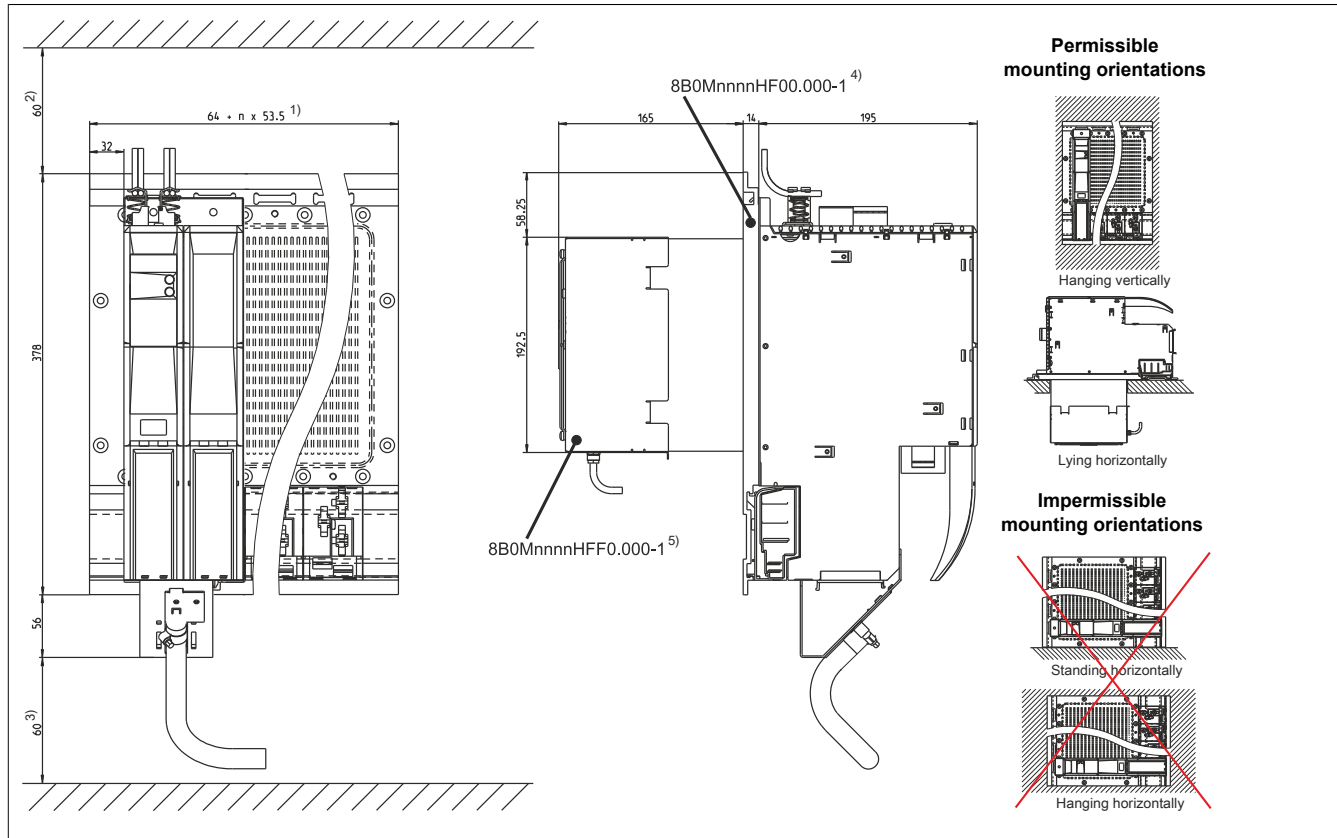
Feed-through mounting - Dimension diagram and installation dimensions
